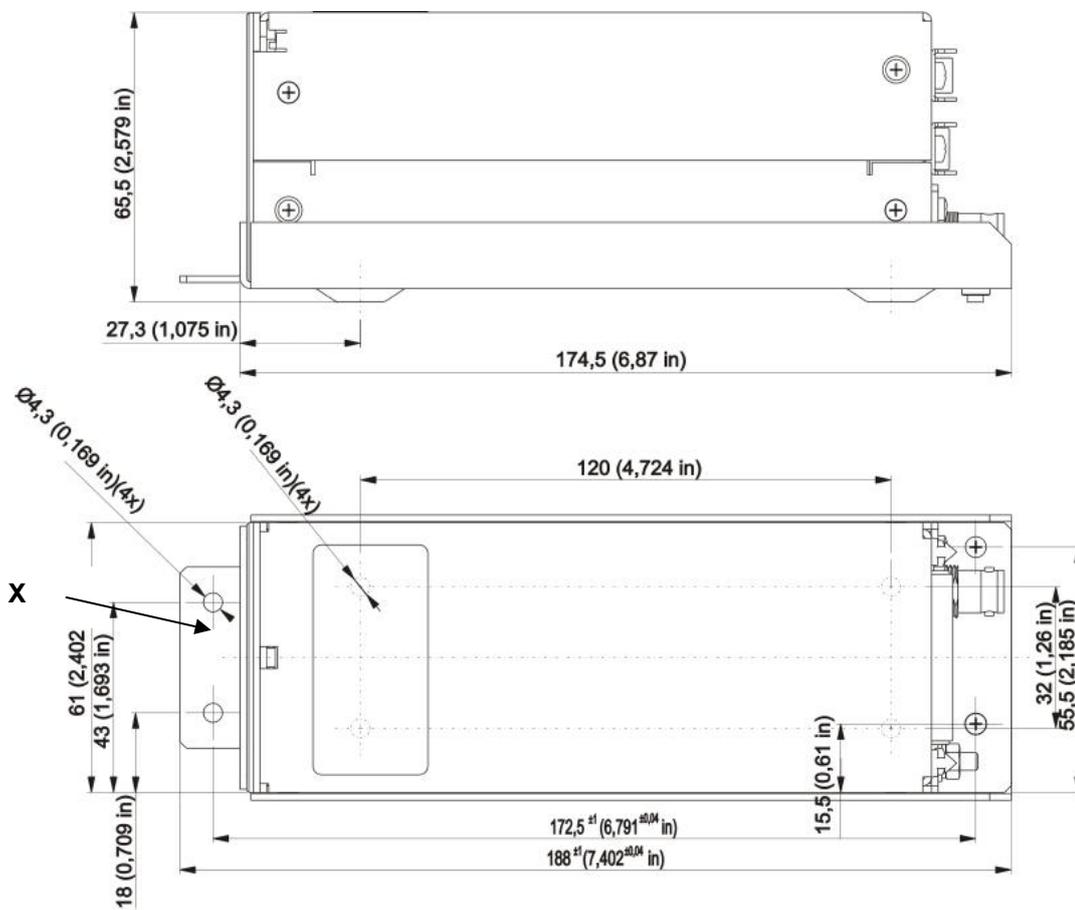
Dimensions RT6201 with mounting kit MK6201
